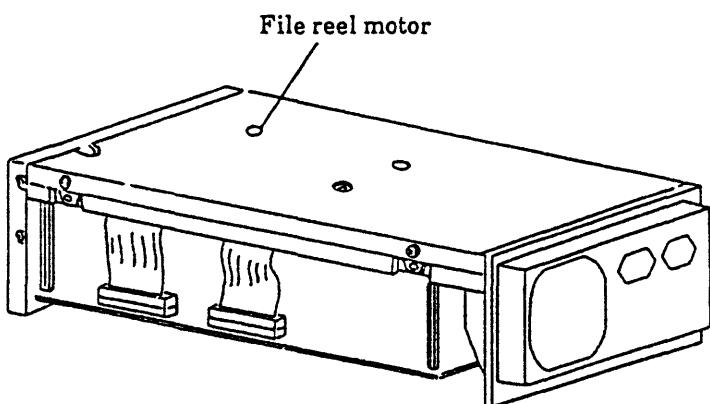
Cartridge tape removal (tape is wounding into machine reel)
